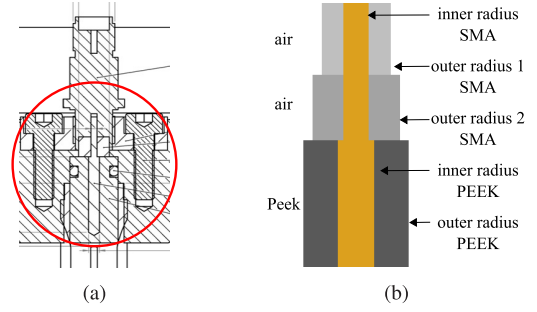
CAD-design and schematic representation of the realized coaxial-to-waveguide adapter. (a) CAD-design. (b) Schematic-representation.
